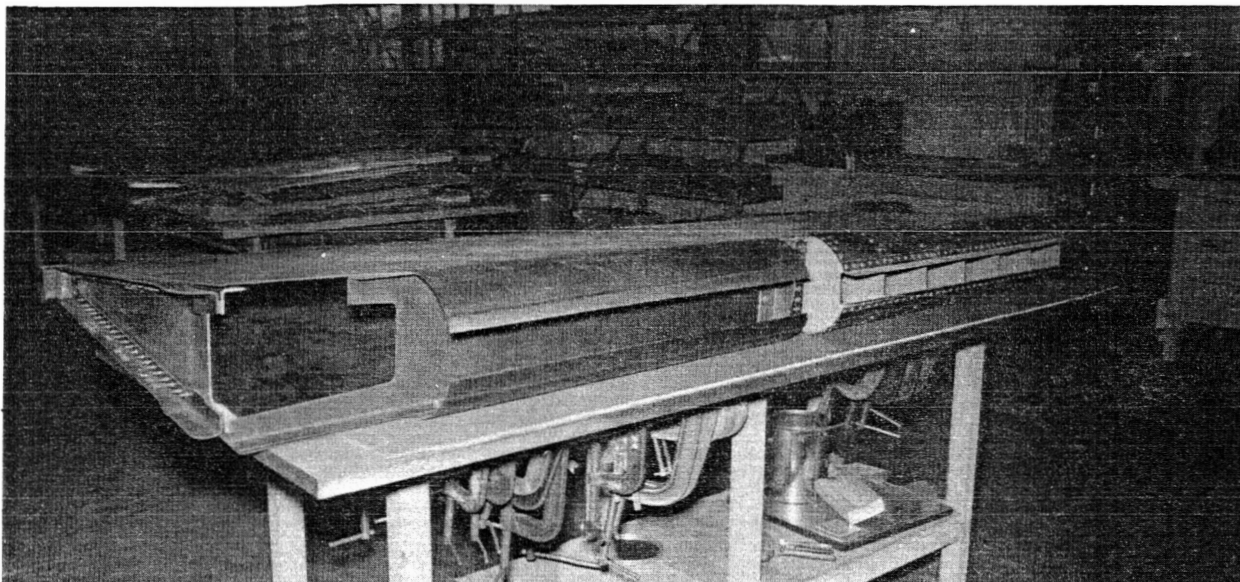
Manufacturing Verification Hardware (Test No. 16) Showing View of Completed Assembly
